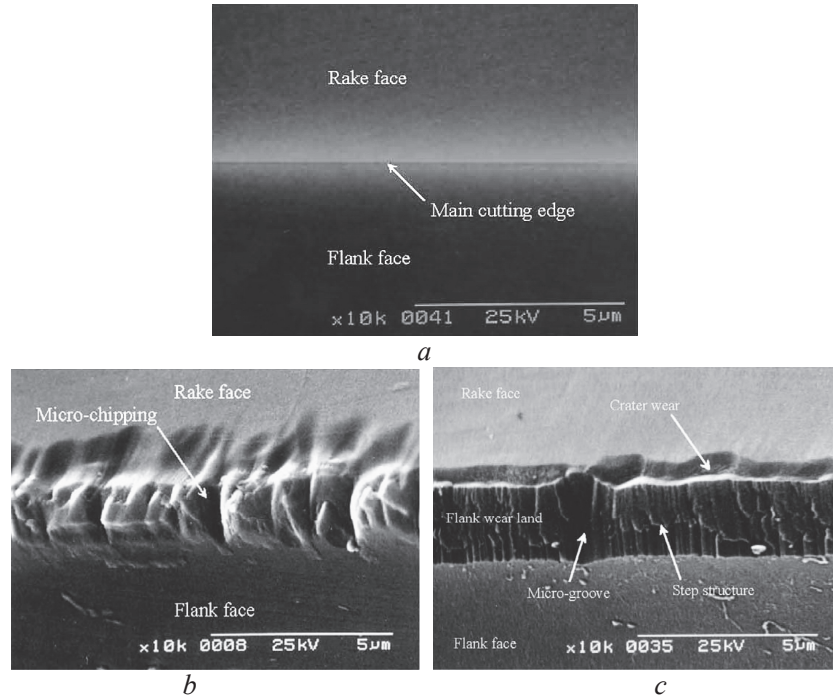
SEM photographs of the main cutting edge of an unused single crystal diamond tool (a), after brittle mode cutting showing occurrence of micro-chippings (b) and after ductile mode cutting showing the changes of crater wear and flank wear land (c) [98]
